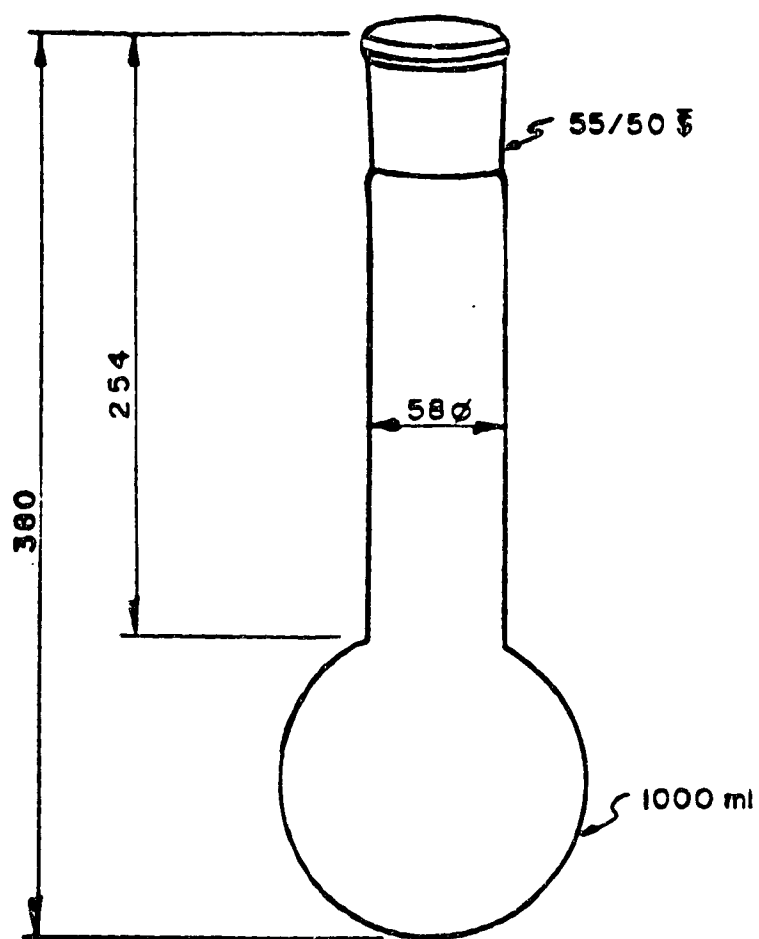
Extraction flask. Linear dimensions have units of millimeters.
